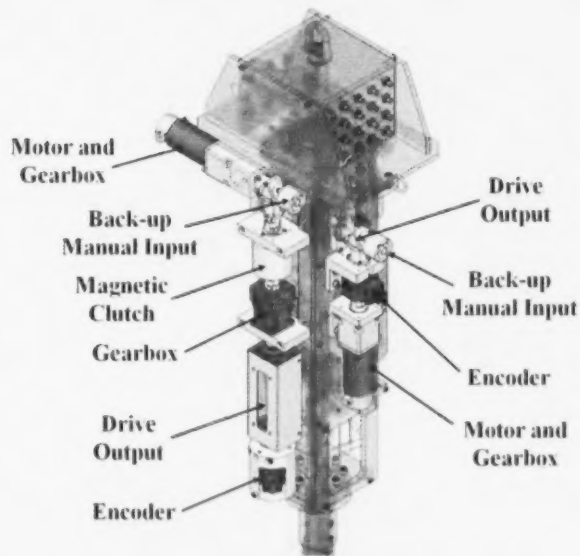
RWI tool drive mechanisms, with magnetic clutch on left and without on right; these are both duplicated on the other side of the tool.
